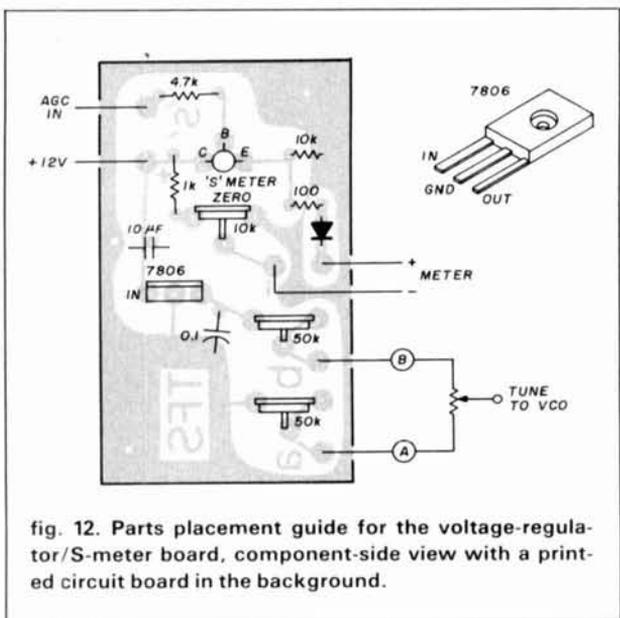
Parts placement guide for the voltage-regulator/S-meter board, component-side view with a printed circuit board in the background.
